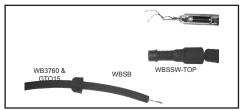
Slide the wetbits sealing bushing WBSB over the sleeving and cable
